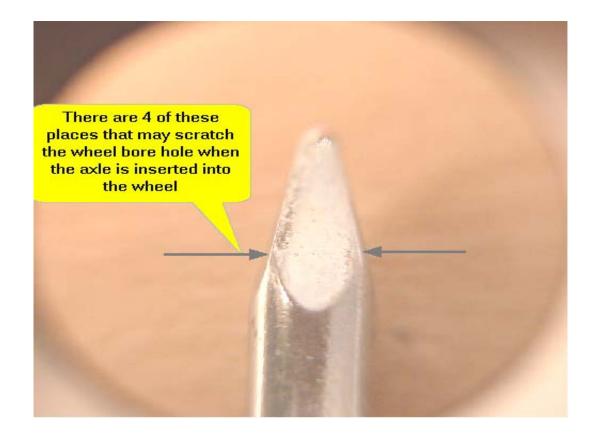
Magnified view of an axle from a BSA kit showing the sharp raised edges that may scratch the inner wheel bore surface.
